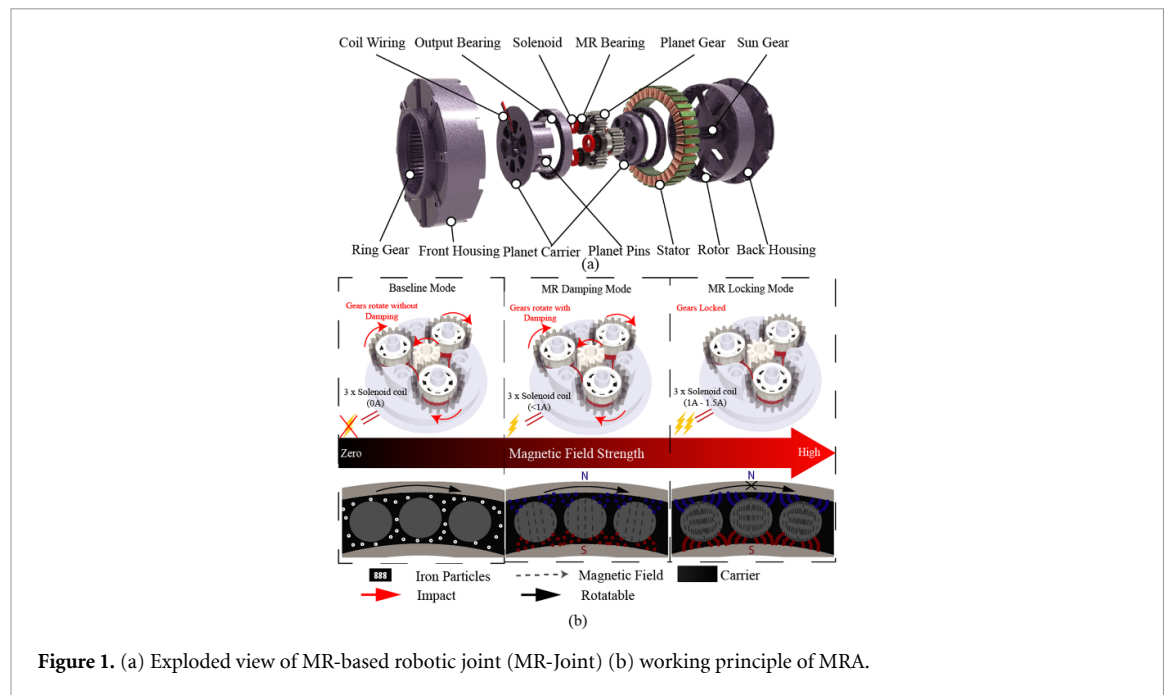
(a) Exploded view of MR-based robotic joint (MR-Joint) (b) working principle of MRA.
